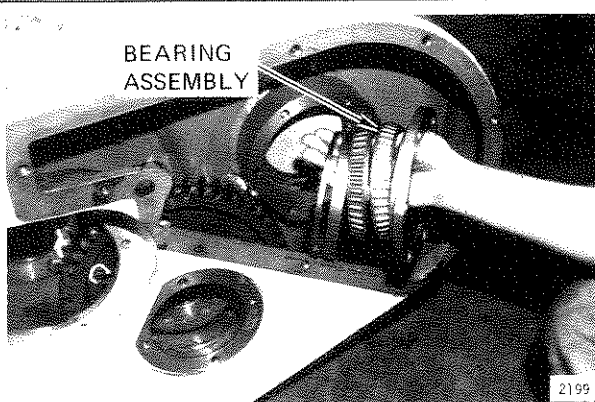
REASSEMBLY OF OIL CLUTCH AFTER S/N W5AP2482 (Sheet 3 of 3)
